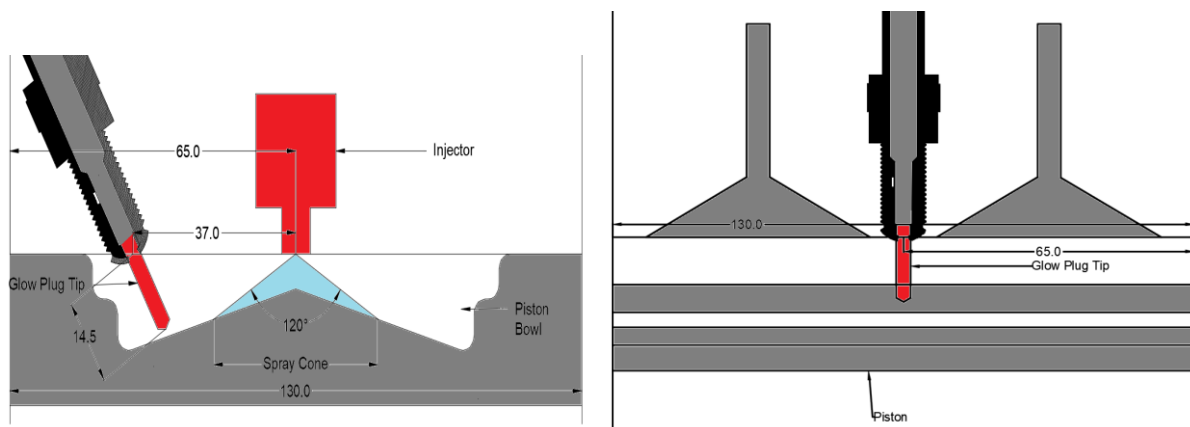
Schematic Of Modified Glow Plug Setup (i) From the Bottom (ii) From the Side
